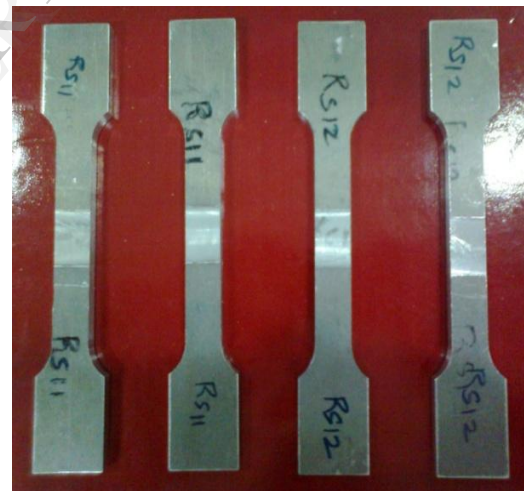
Tensile test specimens of Friction Stir Welded joints of A7075 before testing.
